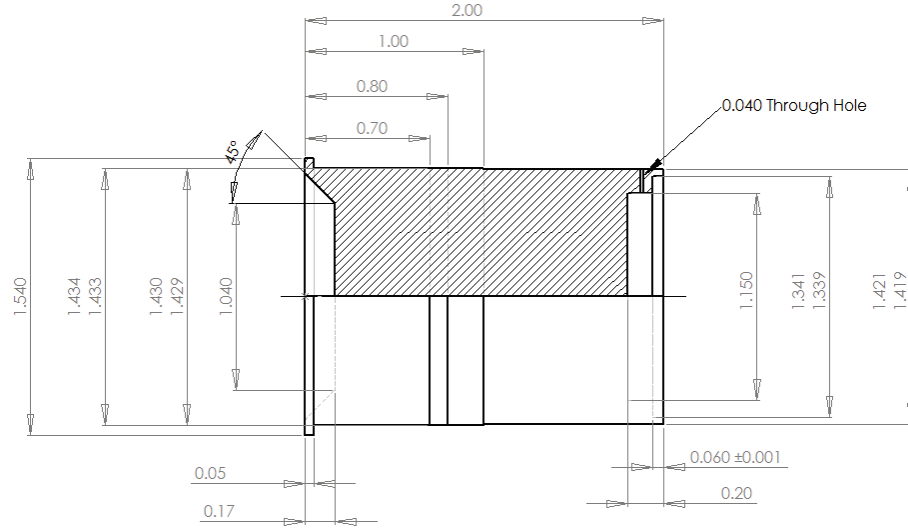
Drawing of the nylatron sabot (dimensions in inches).
